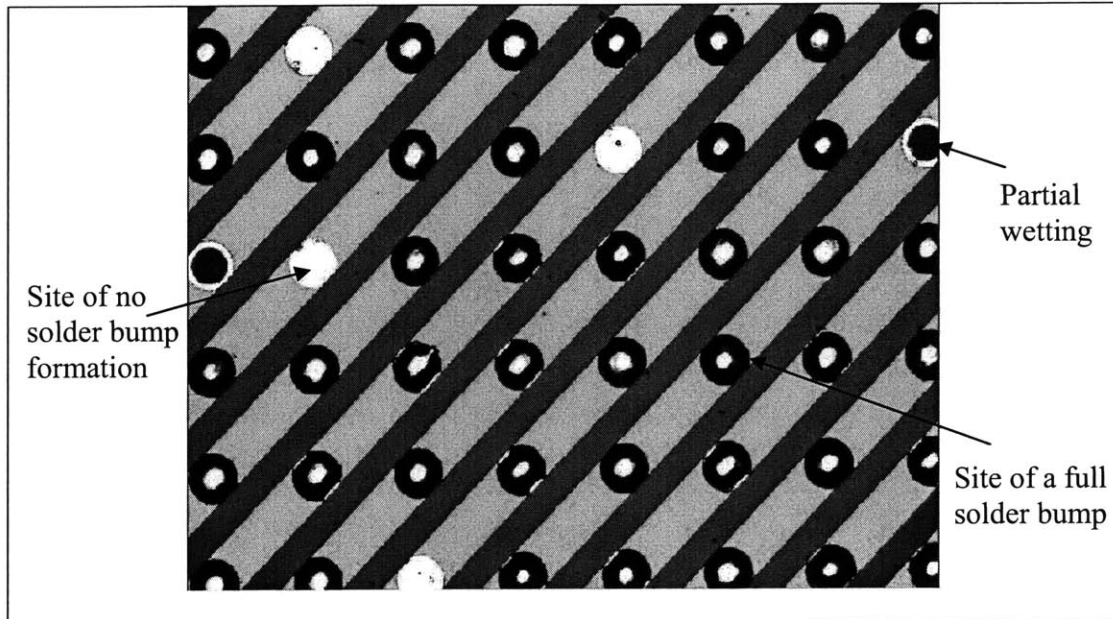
Solder bump formation after 10 minutes in solder bath at 85°C
